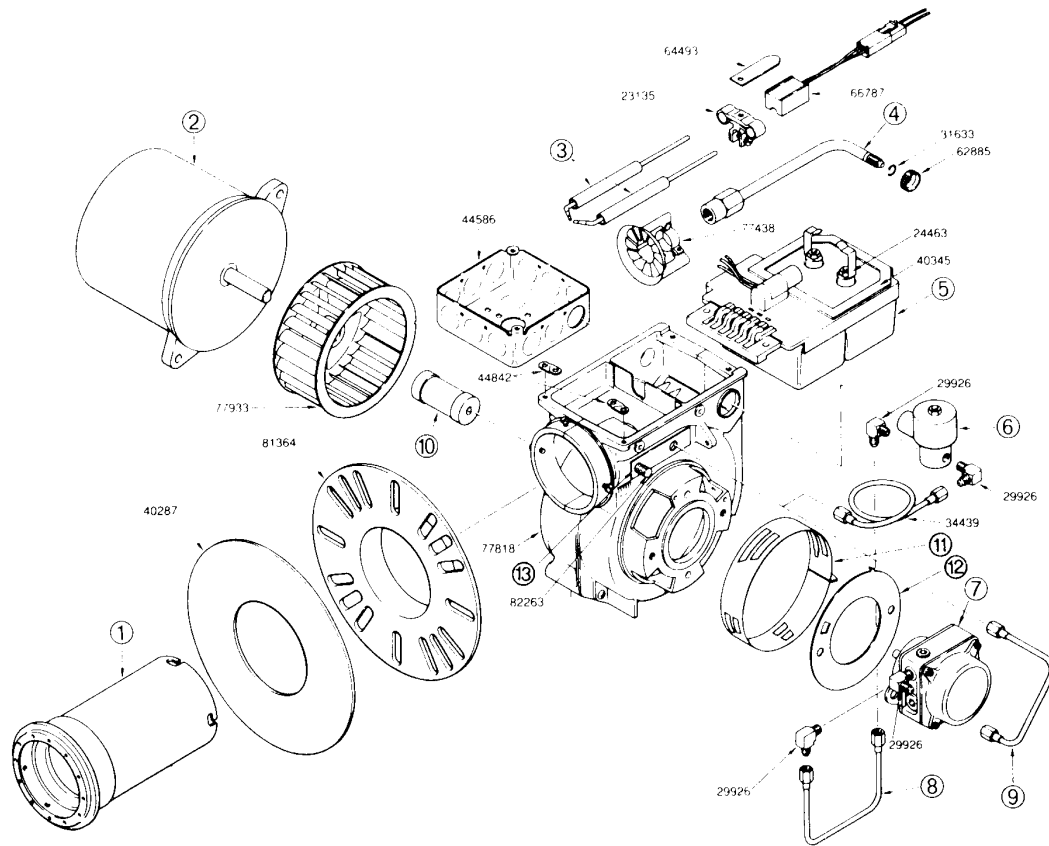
AERO BURNER MODEL HF-US-2X EXPLODED ASSEMBLY
